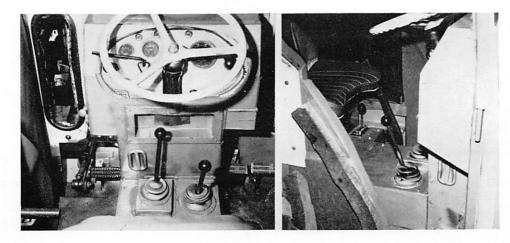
Combined sheet steel bulkhead for floor and cab.
